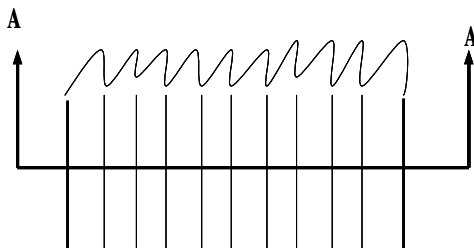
Schematic of chip showing sectioning for viewing side cross sectional view
